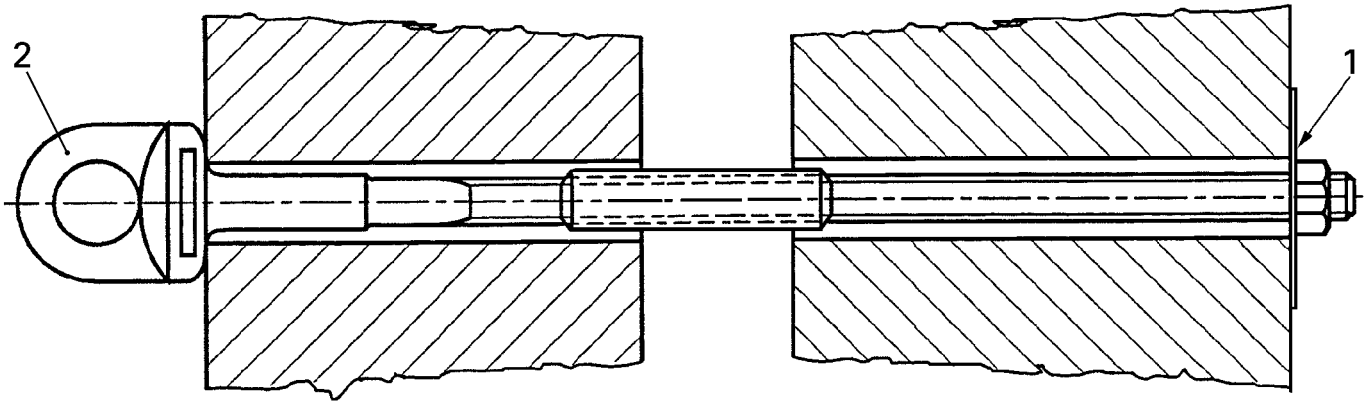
Examples of incorrect bearing surfaces in hook/anchor assembly
